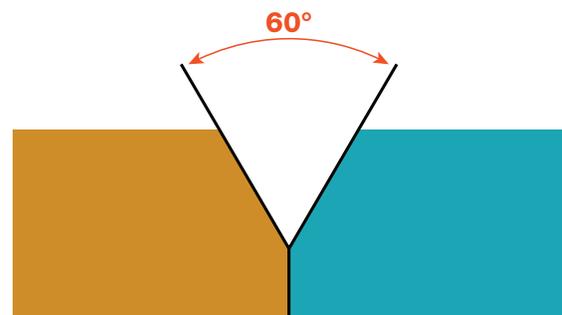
Chamfer added to parts for better penetration during hot air welding.
